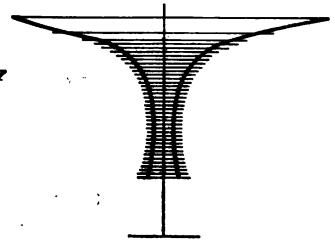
Wulsty Castle*: Type of Blade which would be Required in High Power Turbines where Full Length Blades are Used
